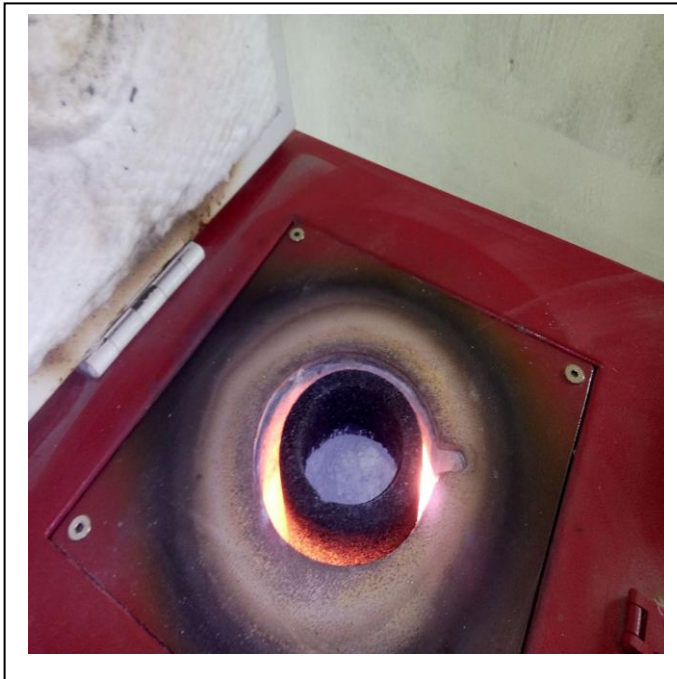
FABRICATE PART OF MG-SIC PISTON
